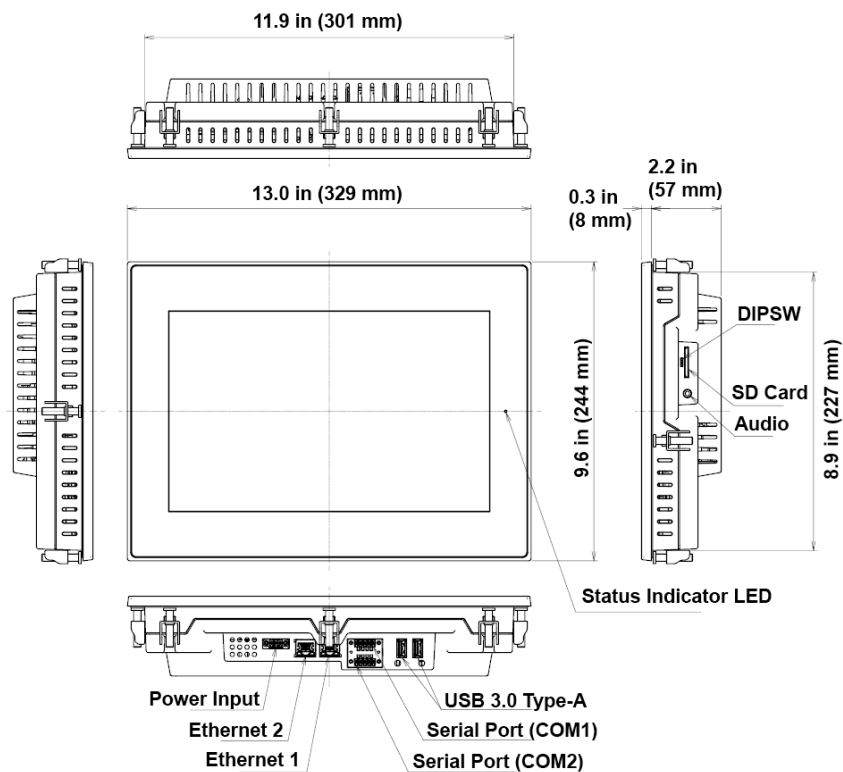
IC762CxS12Cxx Rear View & Dimensions
